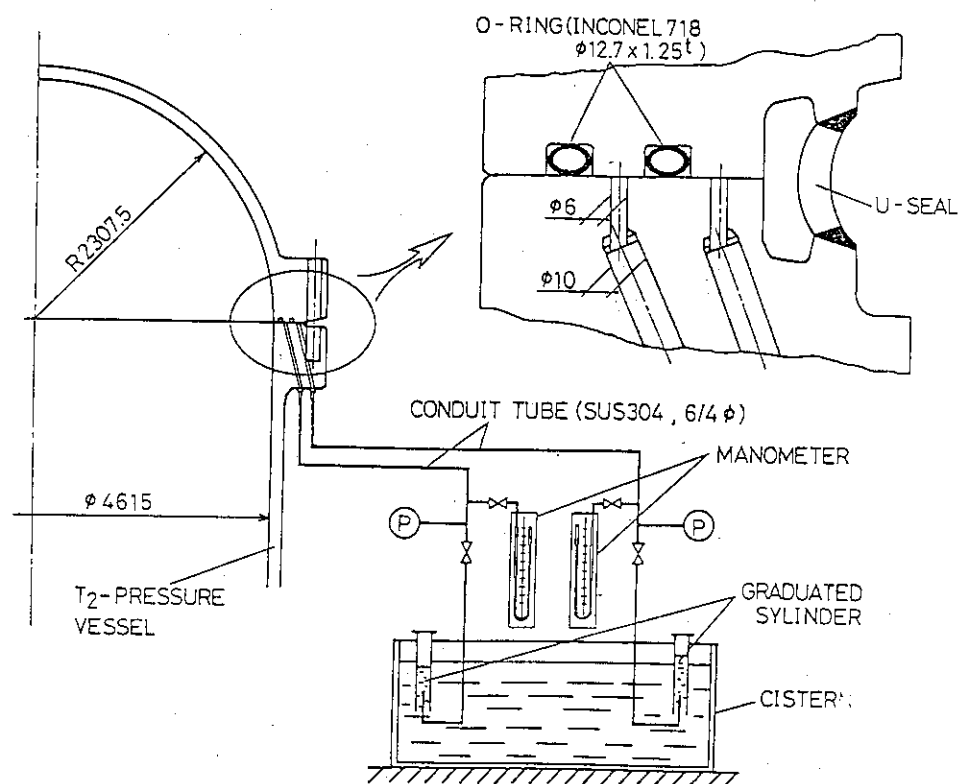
Sectional View of Flanges and Measuring Set Up
